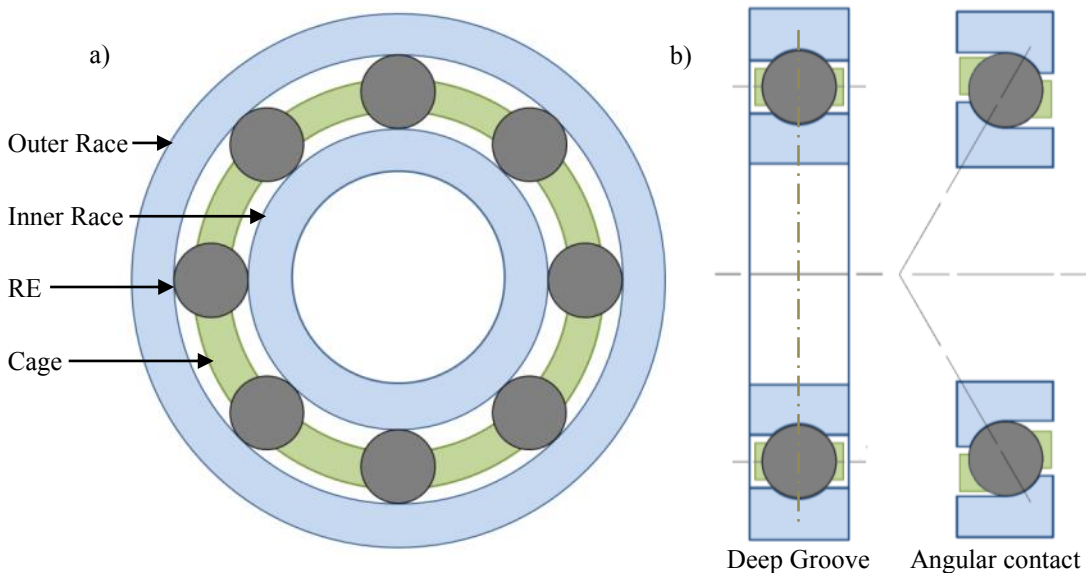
Cross sections of a RE bearings a) front on view and b) Side on views of two common bearing designs
